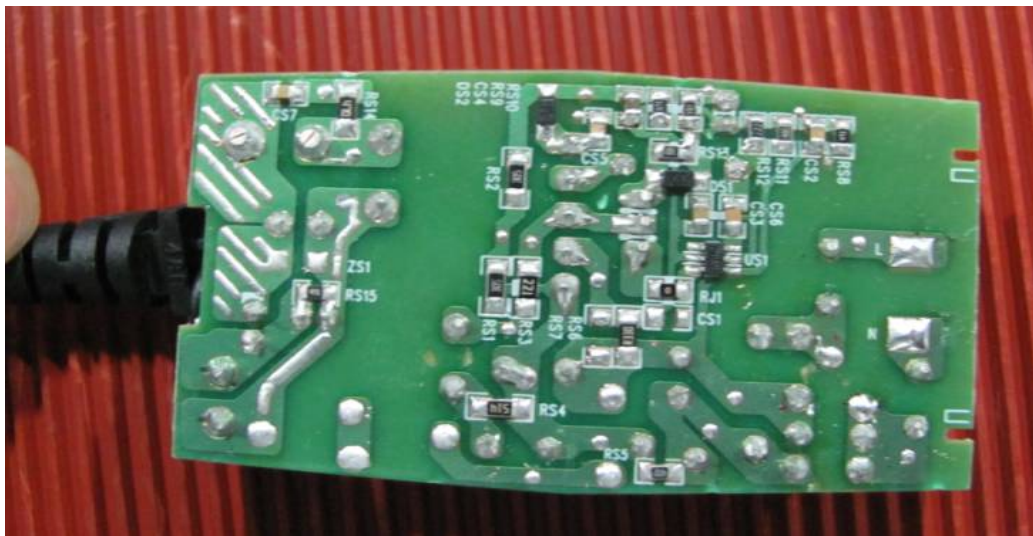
SOLDERING SIDE VIEW OF PCB OF ADAPTER MODEL GT*41134* (First structure)
